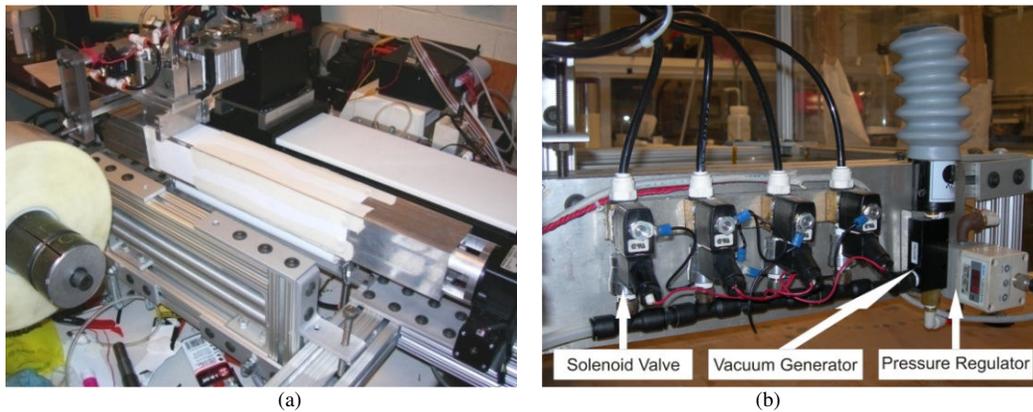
(a) Paddle Assembly (film working surface) (b) Vacuum System
